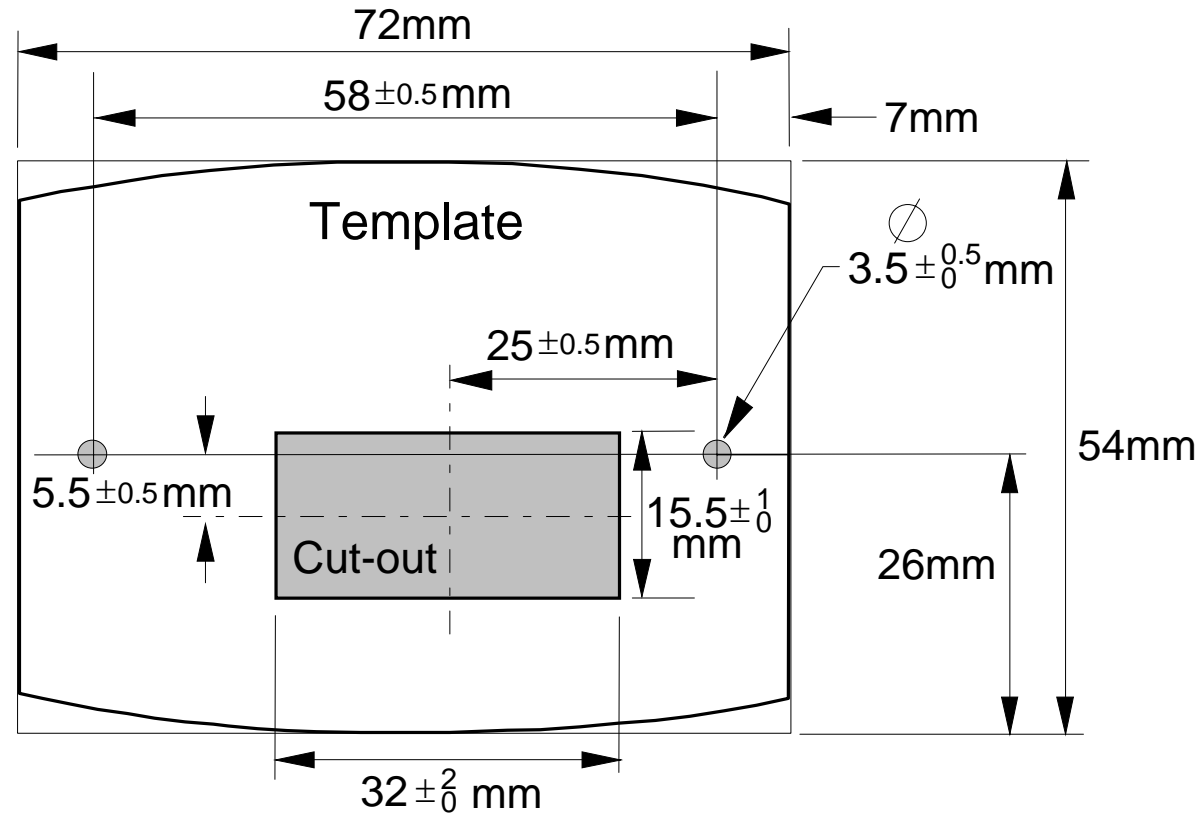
Mounting Dimensions for the Remote-Mounted 6511 Keypad
